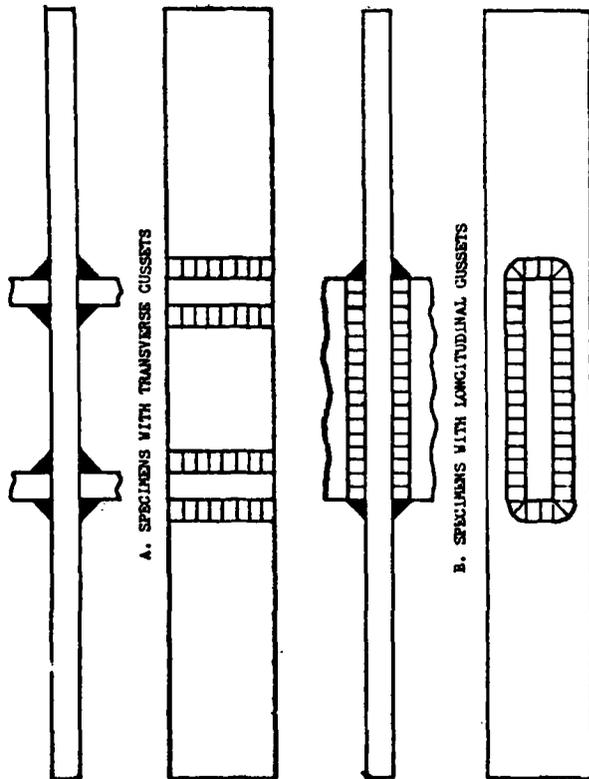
DETAILS FOR TEST SPECIMENS (18)
